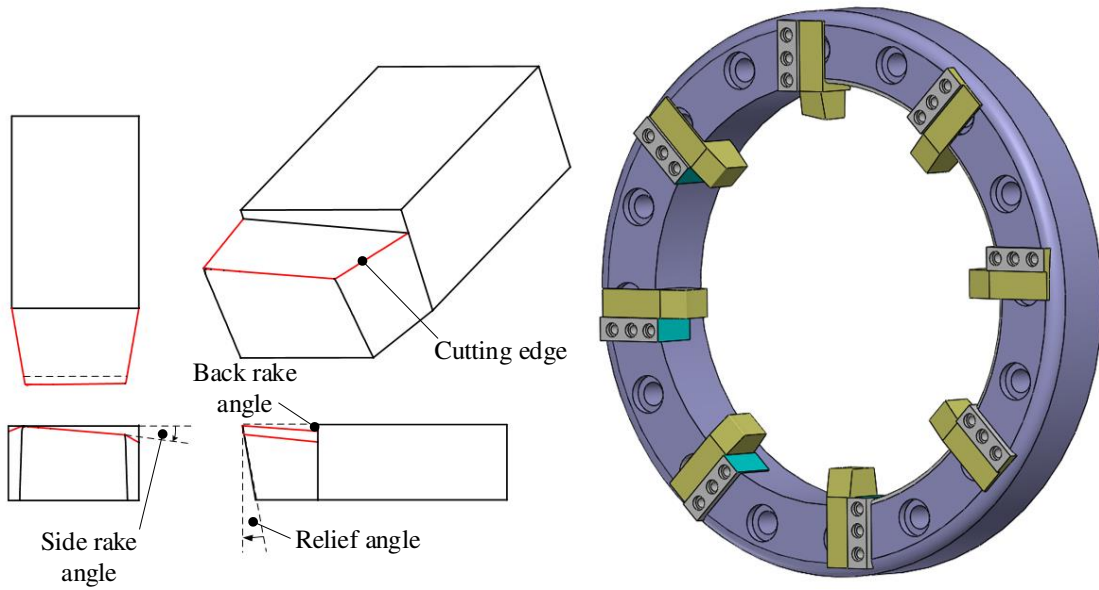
The 3-D conceptual design of the whirl-machining tool
